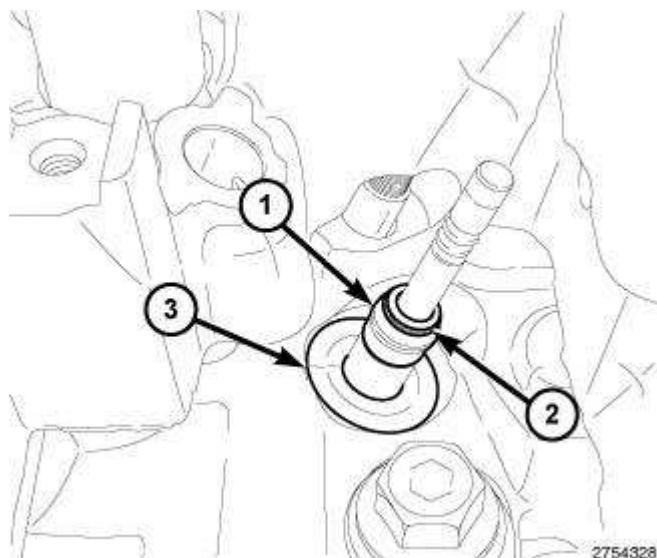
Spring Seat, Valve Guide Seal & Garter Spring
